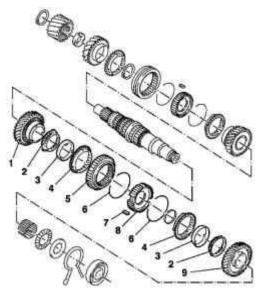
General view of the main shaft and the mechanism of synchronization: 1 - Leading 2-nd gear transmission, 2 - inner synchronizer ring, 3 - intermediate ring, 4 - outer synchronizer ring, 5 - switching hub; 6 - Spring synchronizer; 7 - sliding blocks, 8 - housing synchronizer; 9 - Leading pinion 1-th transmission
